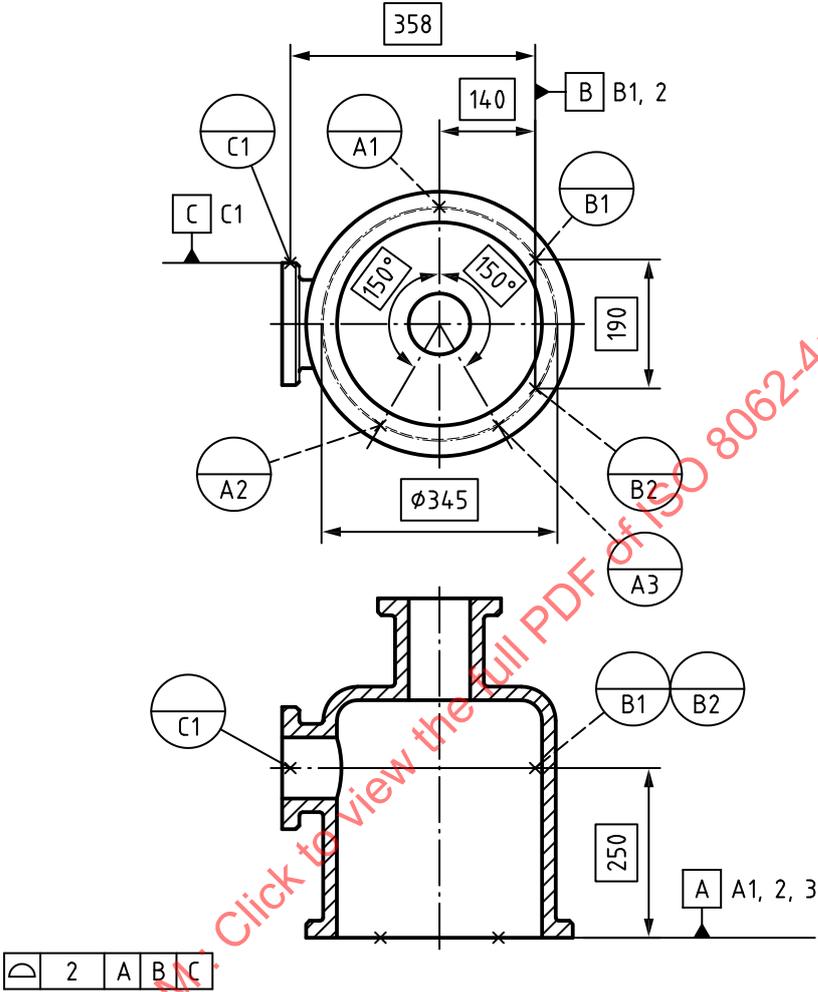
Datum system established by datum targets according to ISO 5459, location of datum targets defined by TEDs
